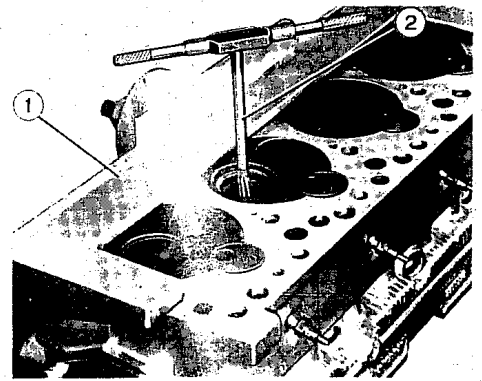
Valve guides to seats fitting data with driver A. 360279 used for valve guide installation.
